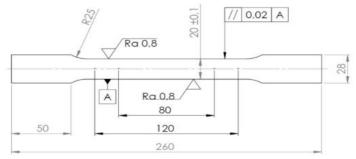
Dimensions of the tested samples for the uniaxial tensile test
